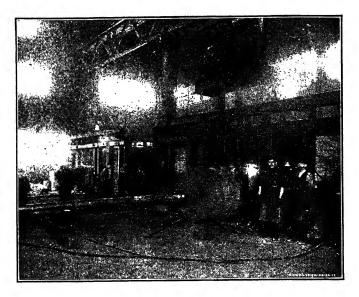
Batch Heating of a Large Piece, Showing Method of Handling.
